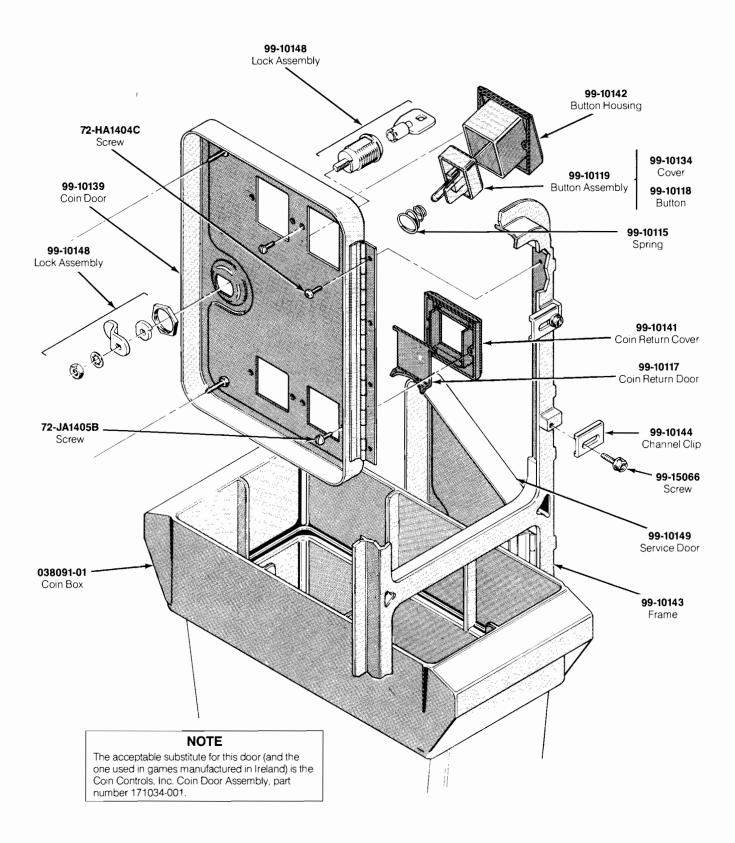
Coin Acceptors, Inc. Coin Door Assembly, Continued 171027-001 A
